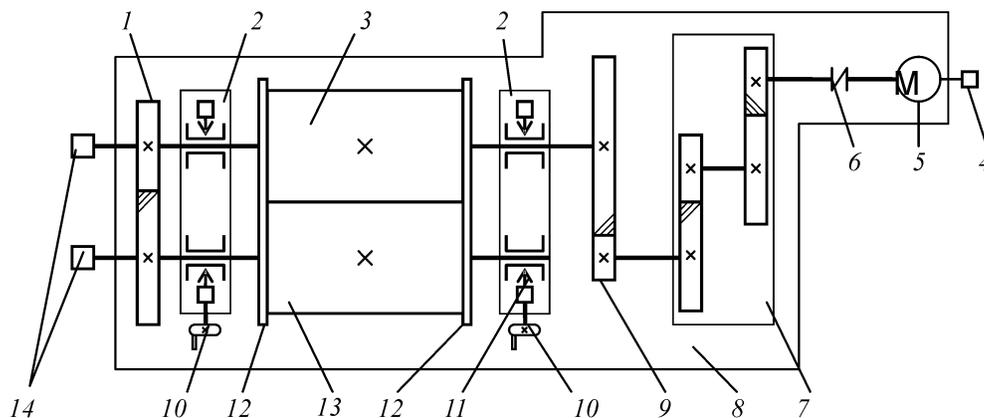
Scheme of roll setup: (1) Friction gears, (2) frames, (3) rear roll, (4) tachometer, (5) the drive motor, (6) clutch, (7) gearbox, (8) welded base, (9) drive gear, (10) mechanisms for moving the front roll, (11) load cells, (12) restrictive arrows, (13) front roll; (14) Collectors for supply of electric current to the heaters of roll.
